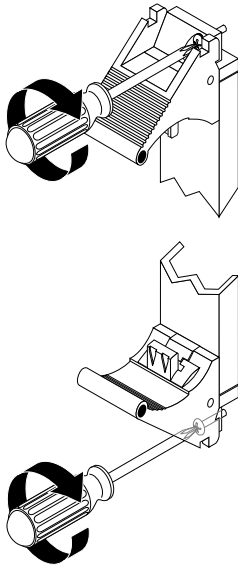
Aligning the Board with the Board Cage Cutouts
